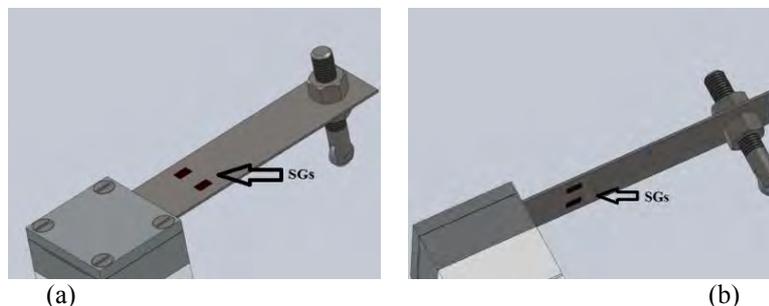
Positioning of SGs in the faces of the blade. (a) Top view. (b) Lower panel.
